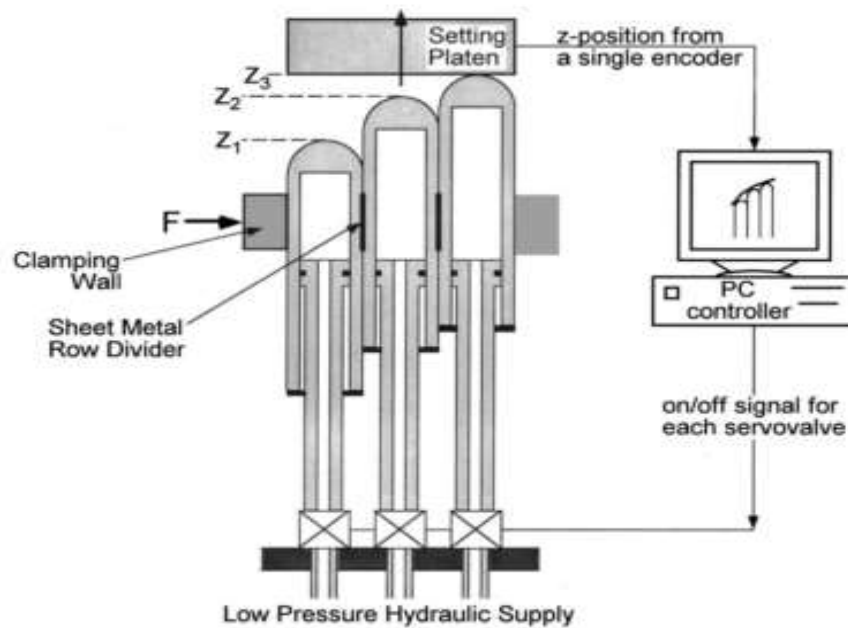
A cross-sectional view of a hydraulically-actuated reconfigurable discrete die [34]
